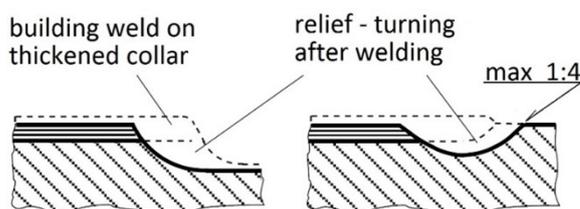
Build-up welds applied to rudderstocks and pintles
